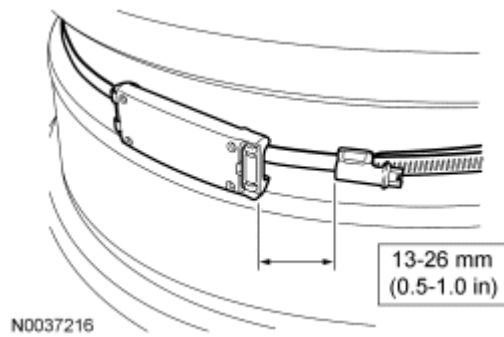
Identifying Worm Gear Distance From Sensor With Specifications
